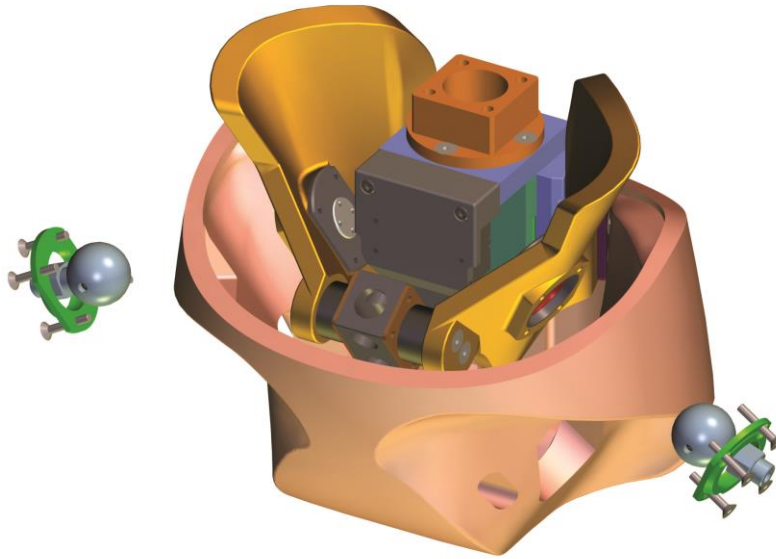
Removing the femur ball assemblies, hip ball retainer plates and flesh.
